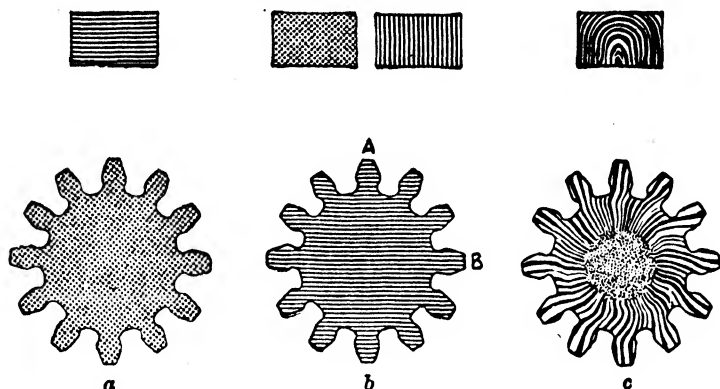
Three methods of forging gear blanks. (*Brearly.*)
